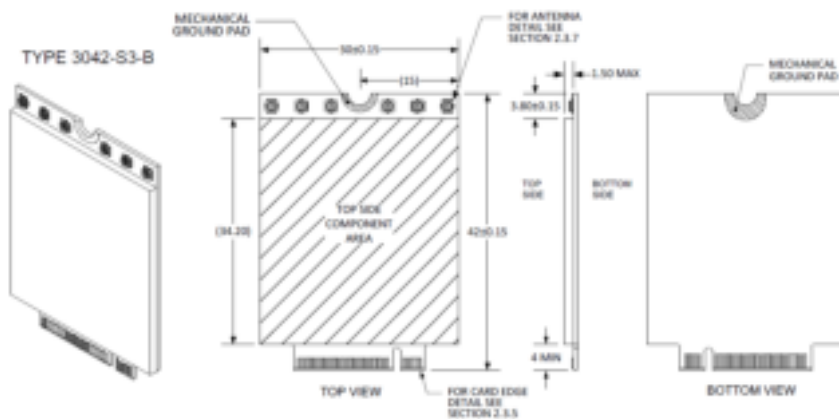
Standard Dimensions of M.2 Type 3042-S3 (Unit: mm)
